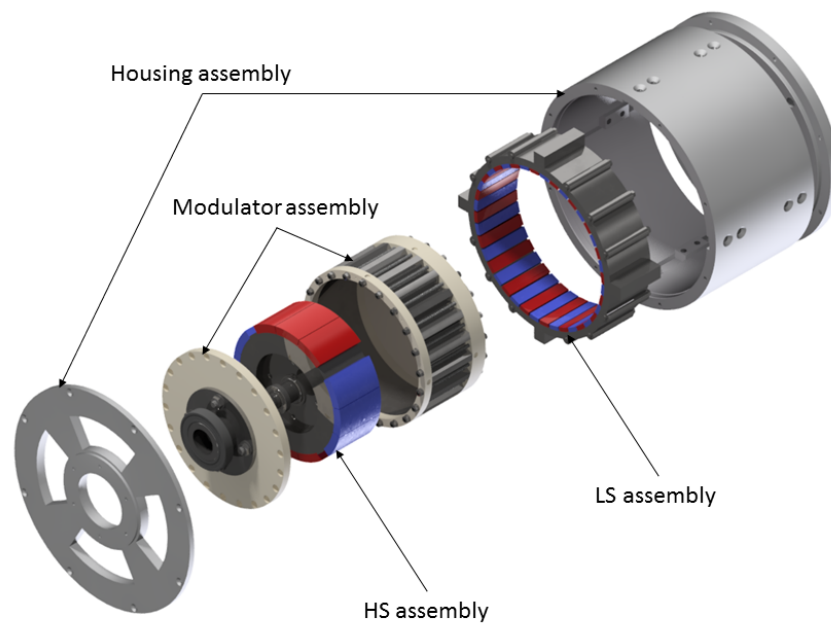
Exploded view of the magnetic gear showing the assemblies.
